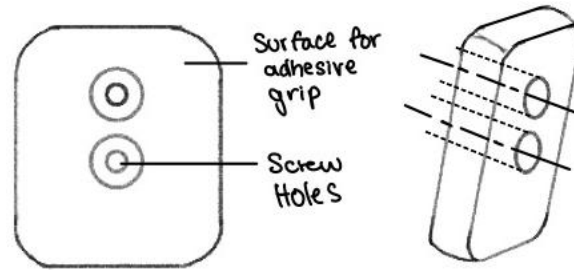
Sketches for Aluminum V1 pedal face with the proposed mounting mechanism. Features a smooth pedal face for an adhesive grip material.
